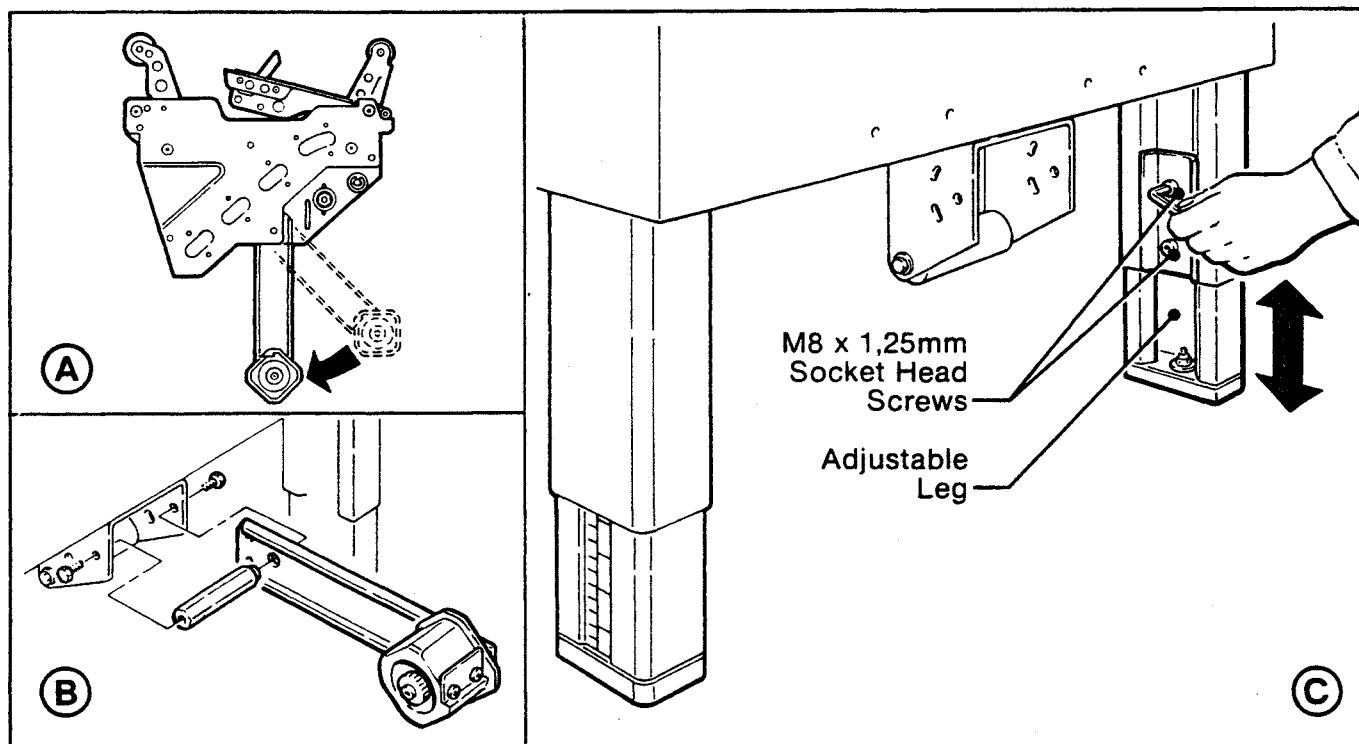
Conveyor Bed Height Adjustment and Lower Tape Drum Bracket Position
